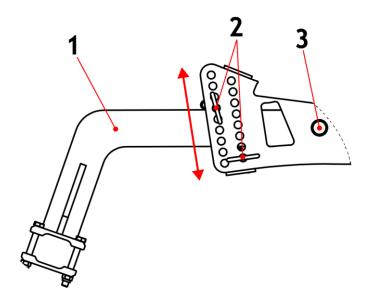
Roller arm attachment (1 - roller arm, 2 - work depth adjustment pins, 3 - hole for pin attaching arm to frame mount)
